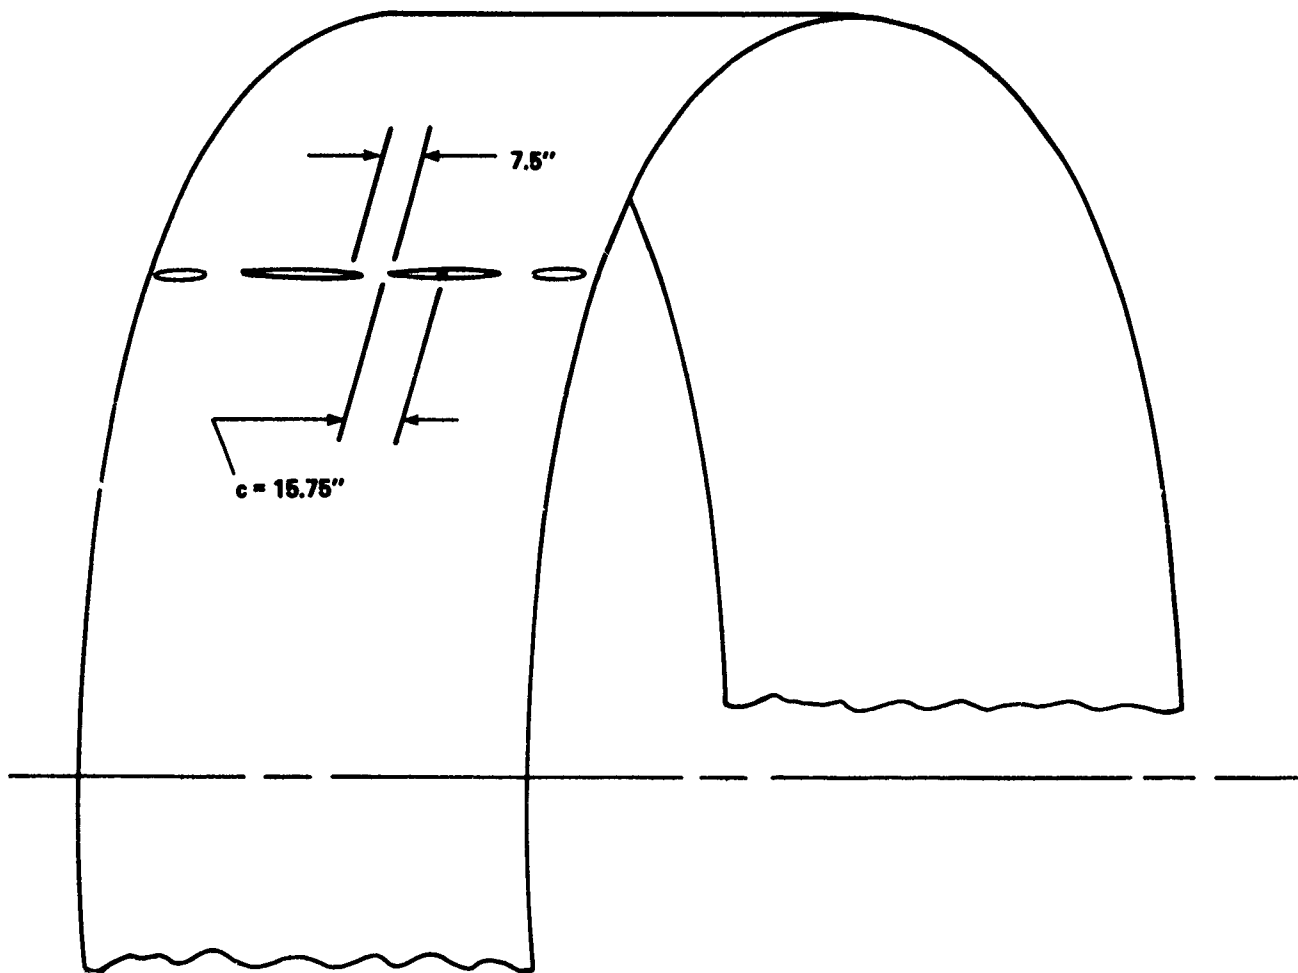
FLAW PATTERN - LOX TANK BARREL SECTION
